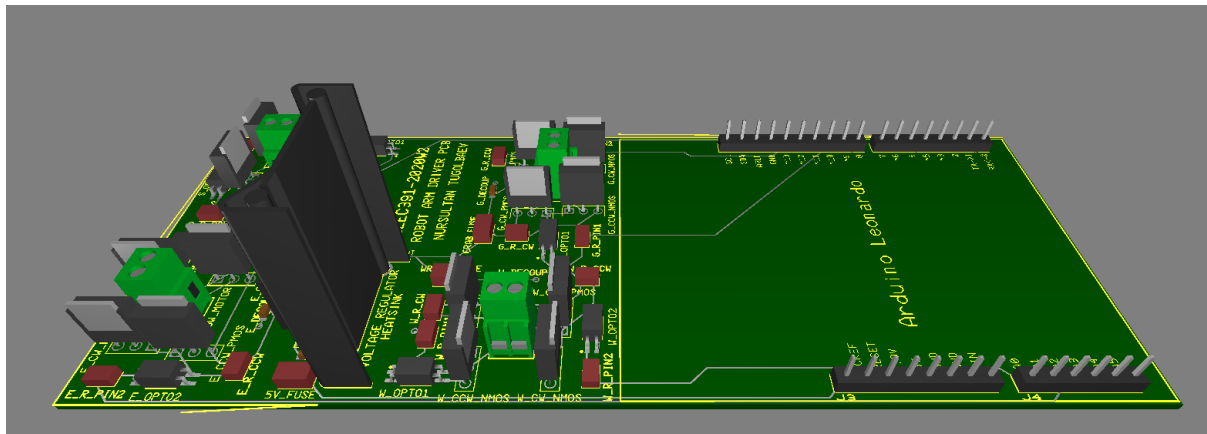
3D View of the Driver PCB Seen in Figure 4.1
